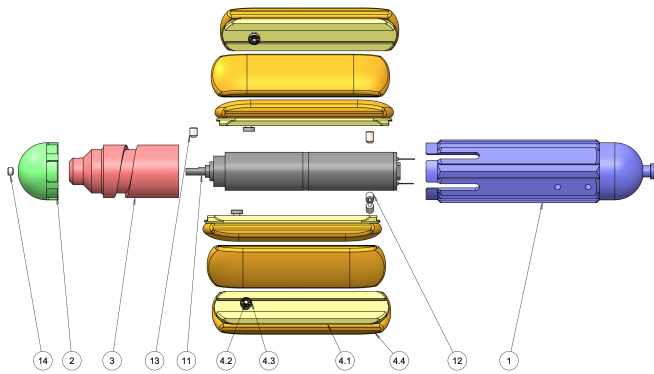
Exploded view of the prototype. Parts: frame (1), cap (2), rotor (3), motor (11), slider (4.1), slider bearing (4.3), bearing axle (4.2), smooth 3D texture (4.4), set screws (12,13,14).
